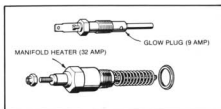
GLOW PLUG AND MANIFOLD HEATER
